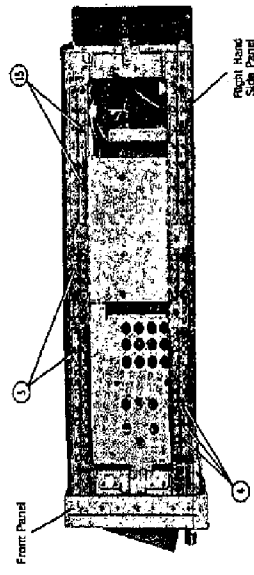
Internal Assemblies, Cables, Mounting Hardware Locations
